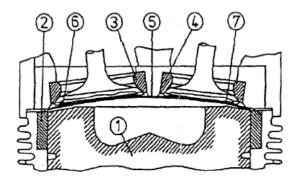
Potential thermal barrier coated components in a diesel engine combustion chamber[2].
